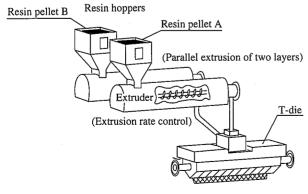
Outline of two-layer T-die resin extrusion equipment
